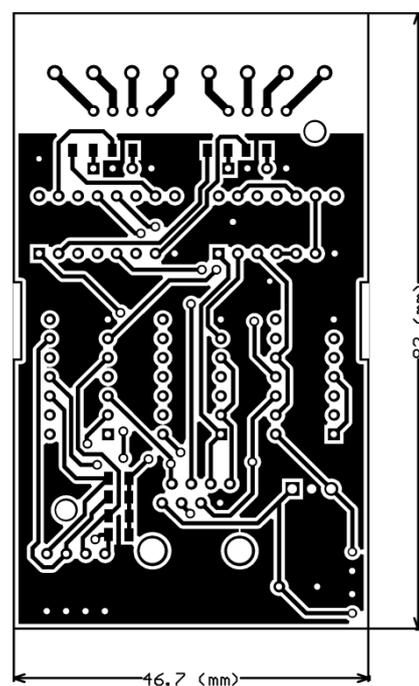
EXTENSION BOARD'S BOTTOM LAYER.
